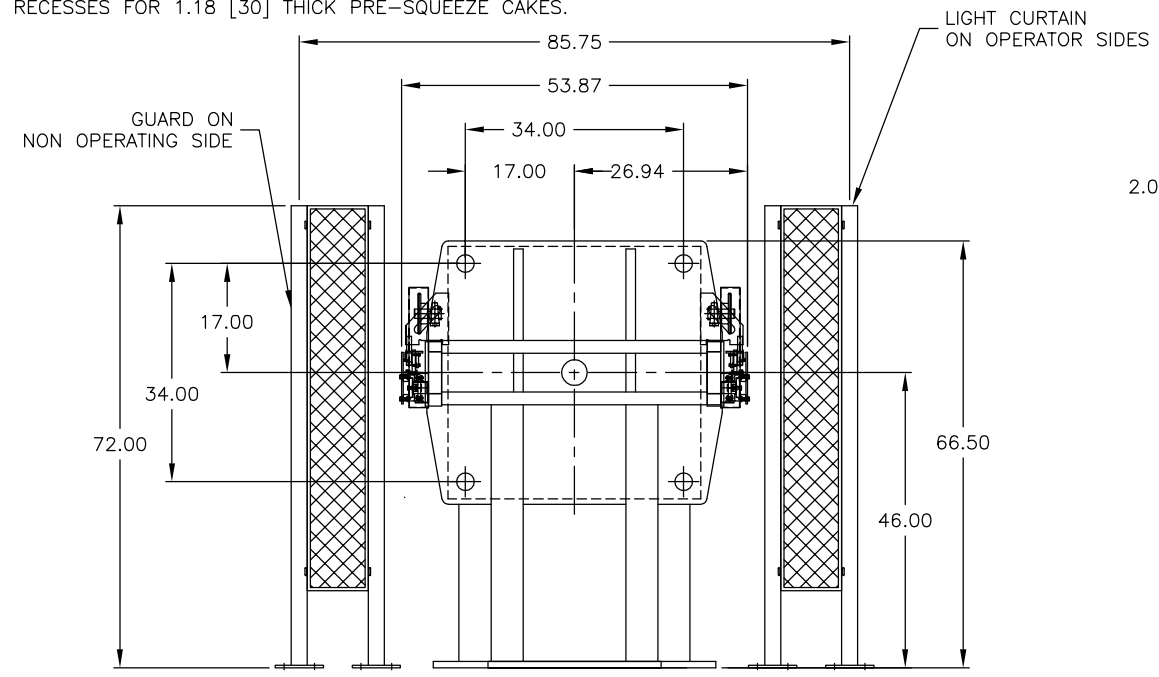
PLATES TO BE CENTER FEED 4 CORNER DISCHARGE. PLATES OF POLYPROPYLENE MIX-PACK GASKETED MEMBRANE CONSTRUCTION WITH .59 [15] RECESSES FOR 1.18 [30] THICK PRE-SQUEEZE CAKES.
